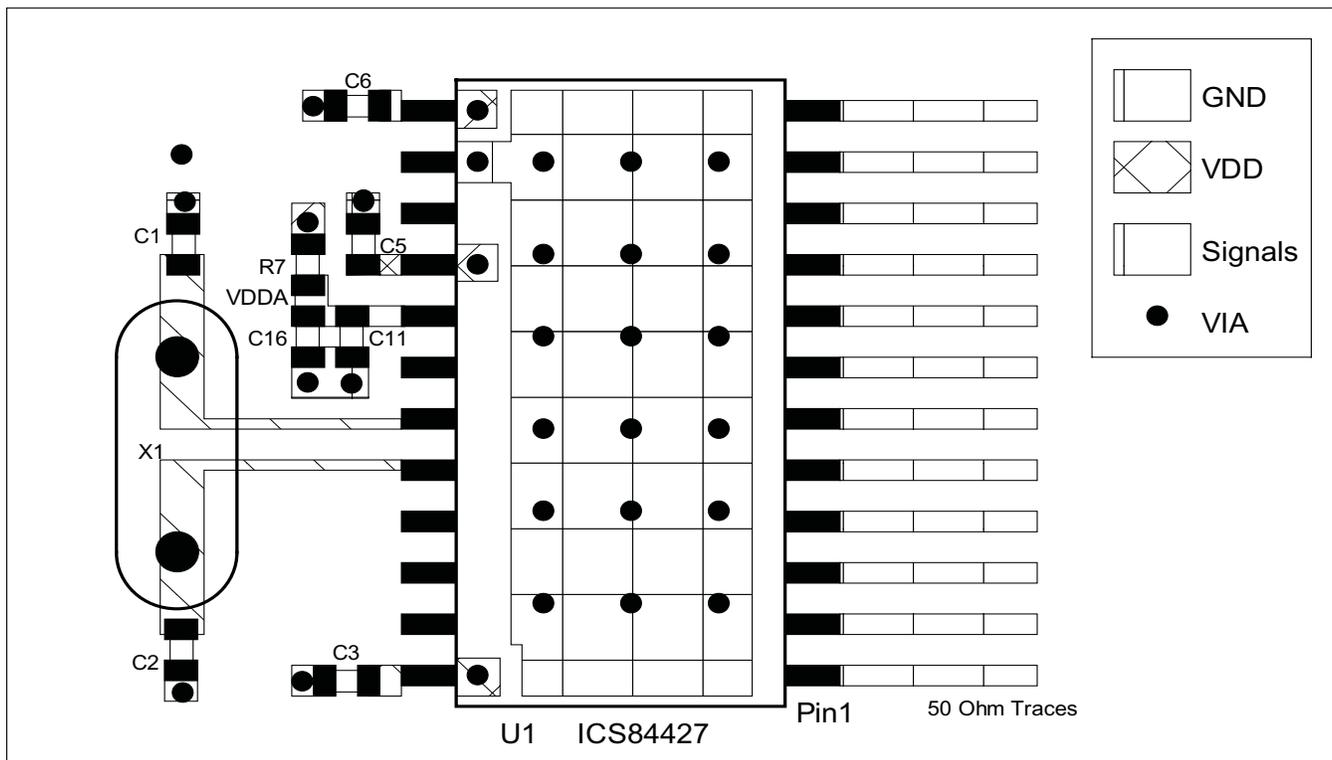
B. PCB BOARD LAYOUT FOR 84427
